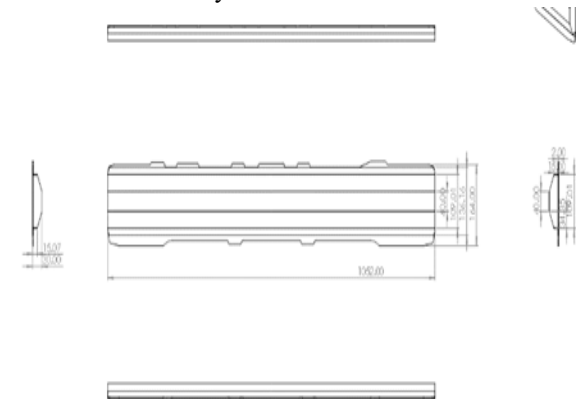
D Drawing and Dimensions of New Bumper Beam.
